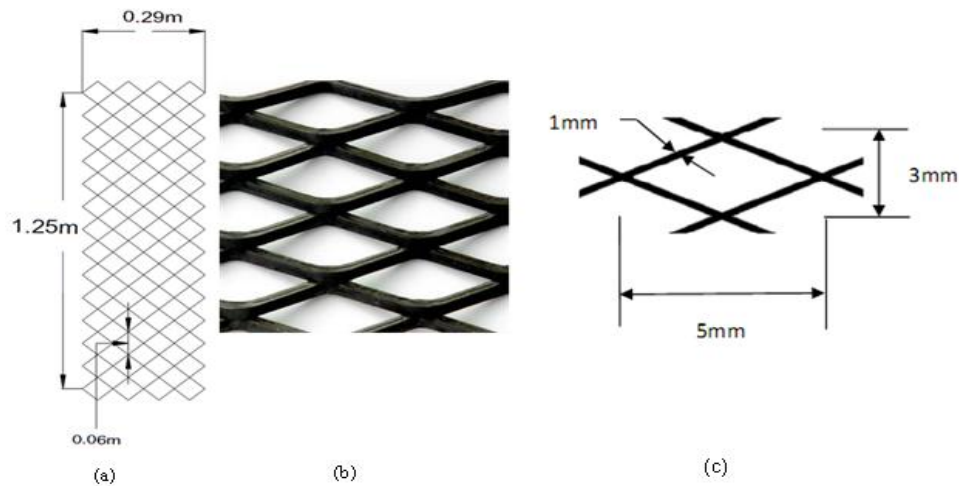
(a) Expanded Wire mesh packing in cooling tower, (b) Enlarged view of expanded wire mesh packing, (c) Wire mesh dimensions
